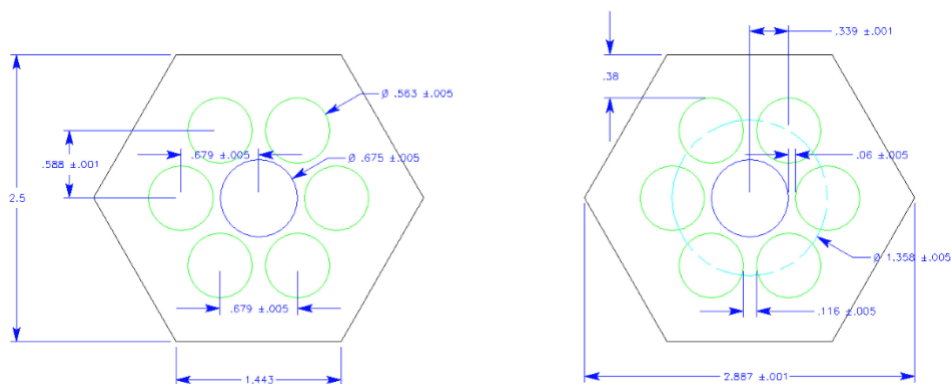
Cross-Sectional Drawing of Core Block for Single Heat Pipe Experiment [1].
